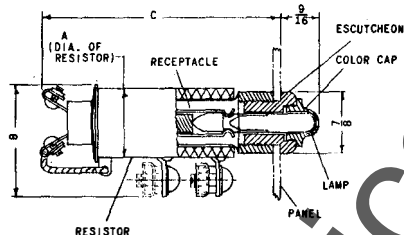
Cross-Sectional View of Type ET-6 Indicating Lamp
